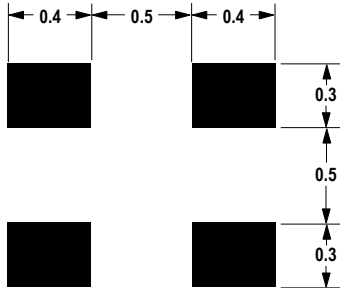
PCB Pad Layout, MiniPak (dimensions in mm).
